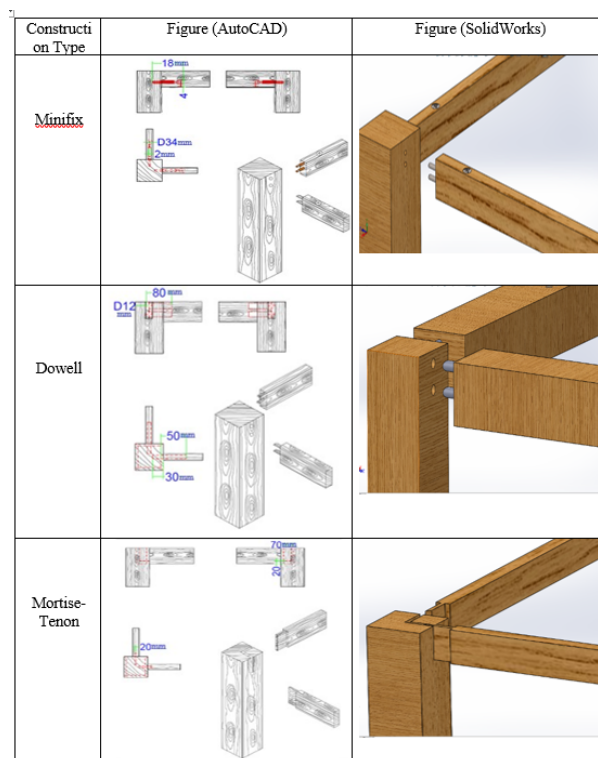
AutoCAD and SolidWorks drawings of constructions
